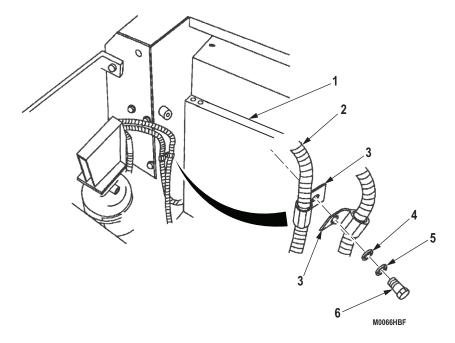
Blade Folder Hose Clamps on Hull Plate Removal.
